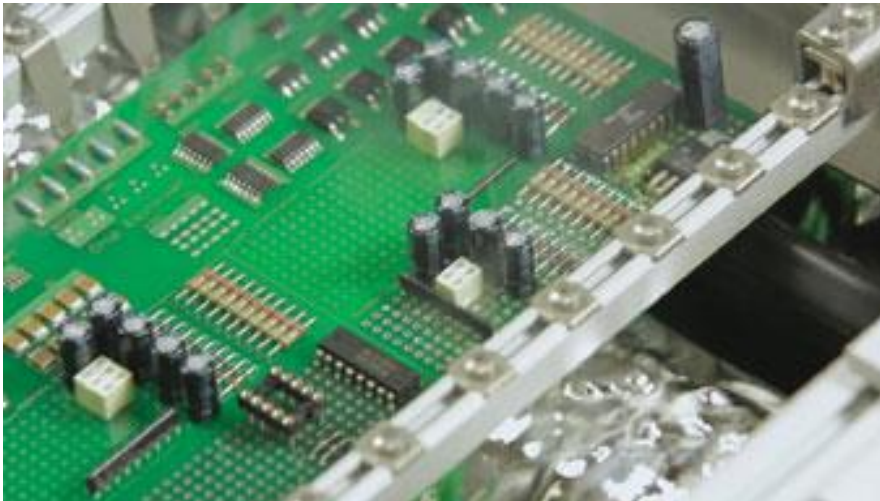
PCB during wave soldering process with soldering fume (© SEHO Systems)
